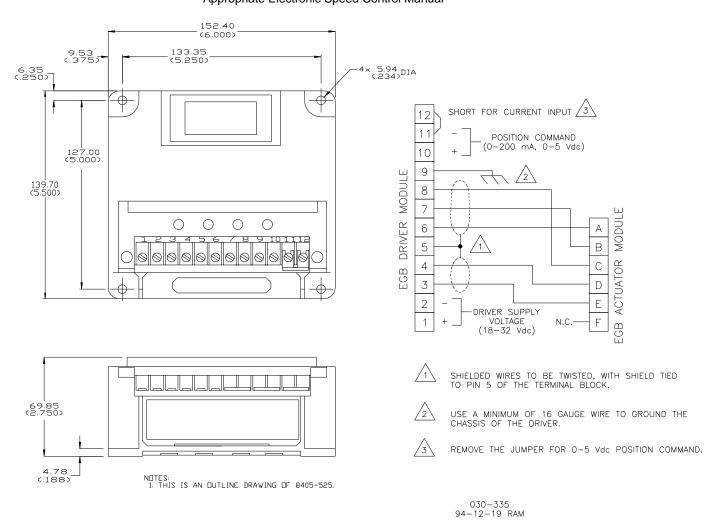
Outline Drawing of 3161-EGB Driver and Plant Wiring
